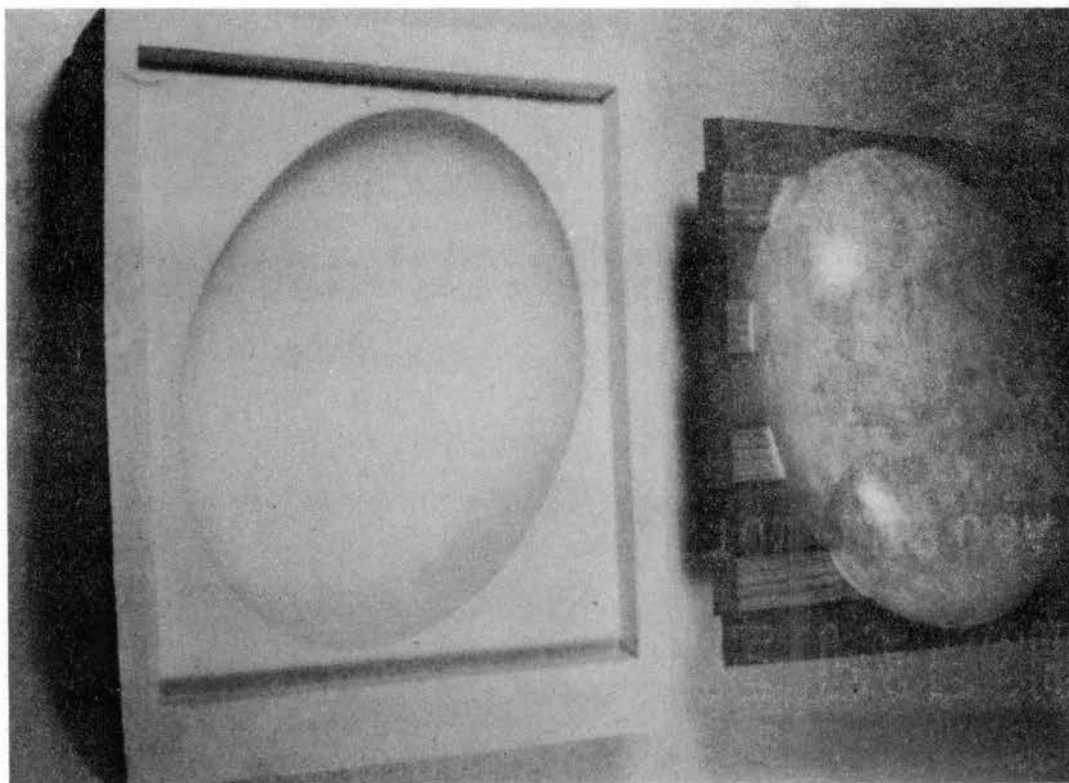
Patterns for the Inside and Outside Dimensions of the Ellipsoid Ready for Casting
